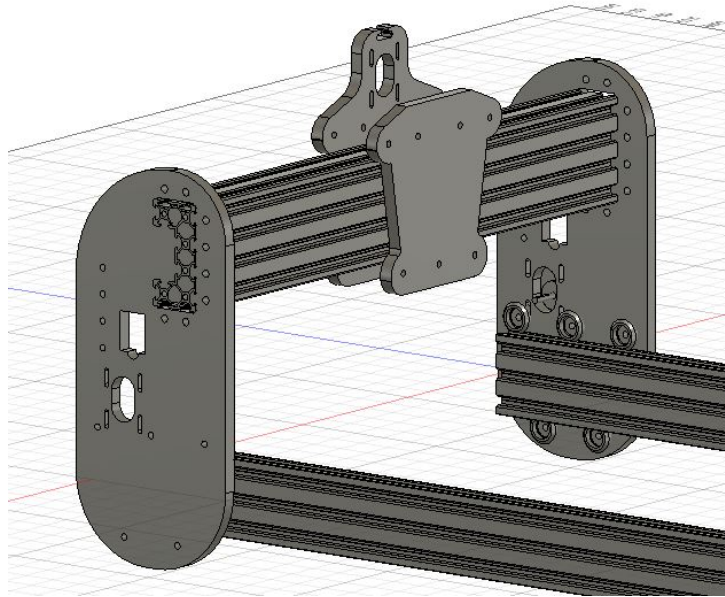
First sketches of PMT CNC machine, designed using Fusion 360.
